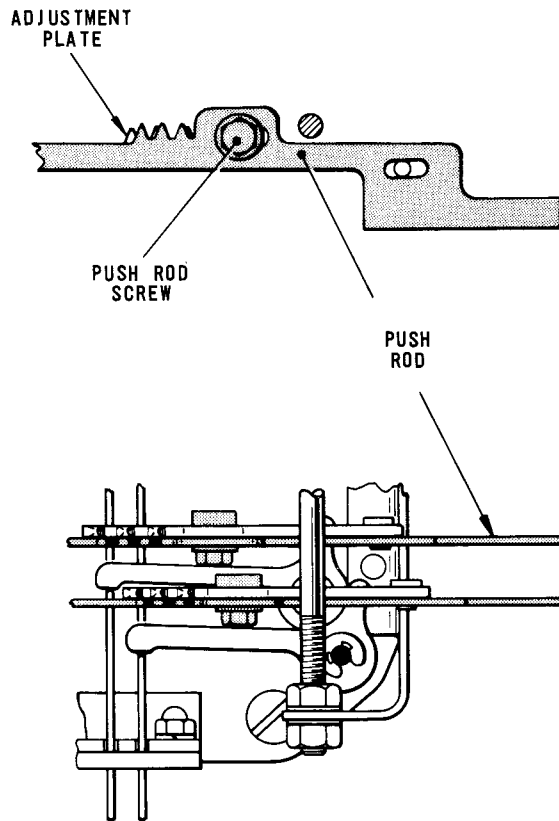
SELECTOR BAR/PUSH ROD LINKAGE
